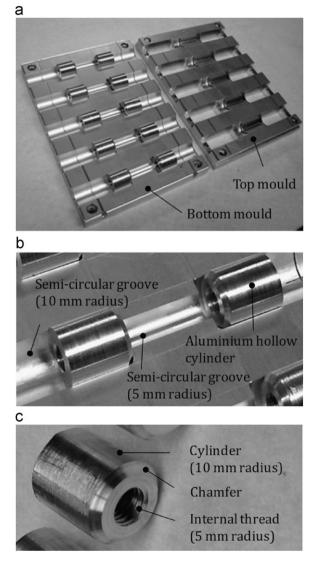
Manufacturing tools: (a) top and bottom aluminium moulds, (b) stepped semi-circular grooves to accommodate aluminium hollow cylinders and (c) aluminium hollow cylinder with internal thread.
